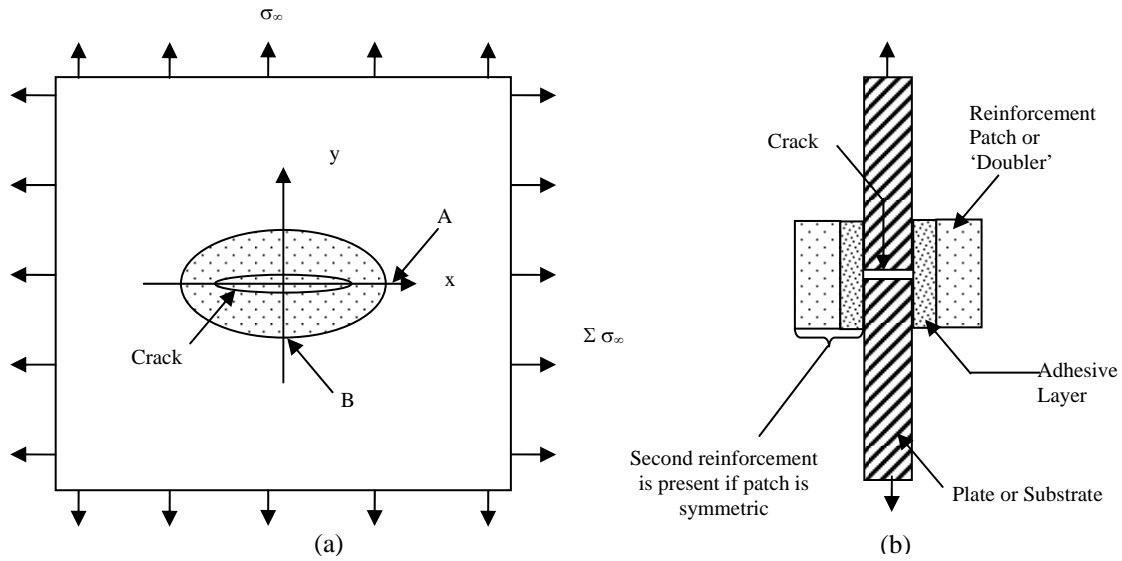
Bonded reinforcement patch over a crack (a) Plan view (b) Cross section along $x = 0$.
